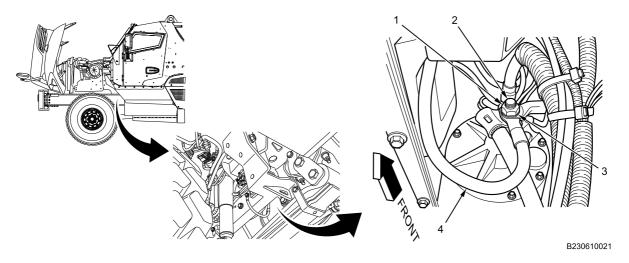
Starter Motor-to-Engine Ground Jumper Cable.
